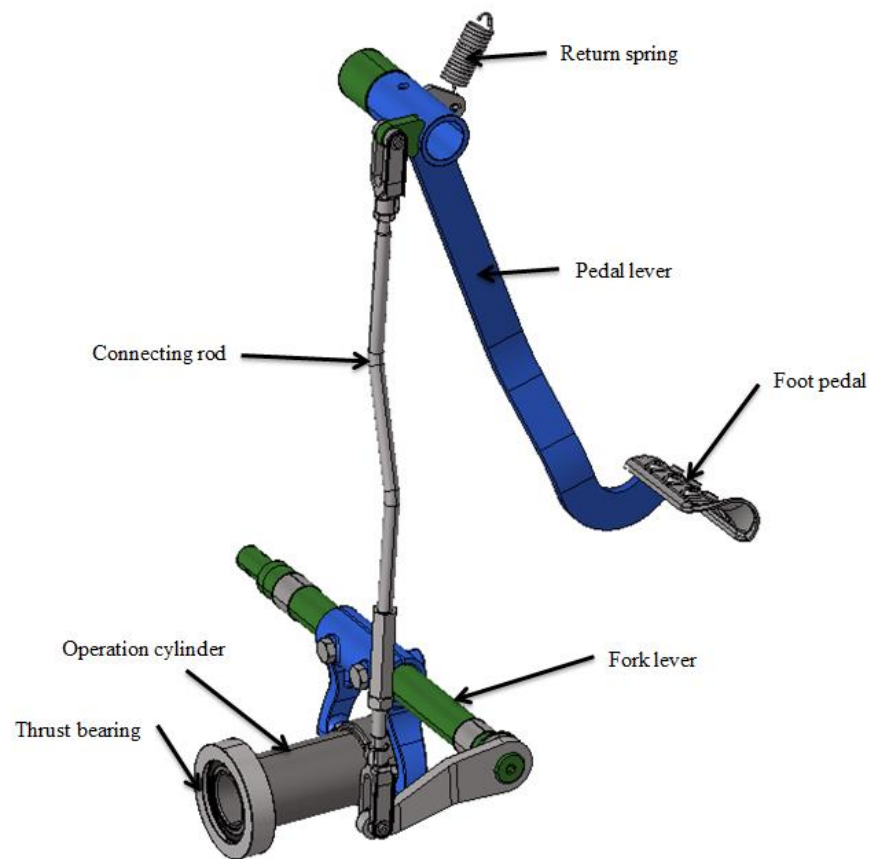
Assembly of a clutch linkage mechanism [1]
